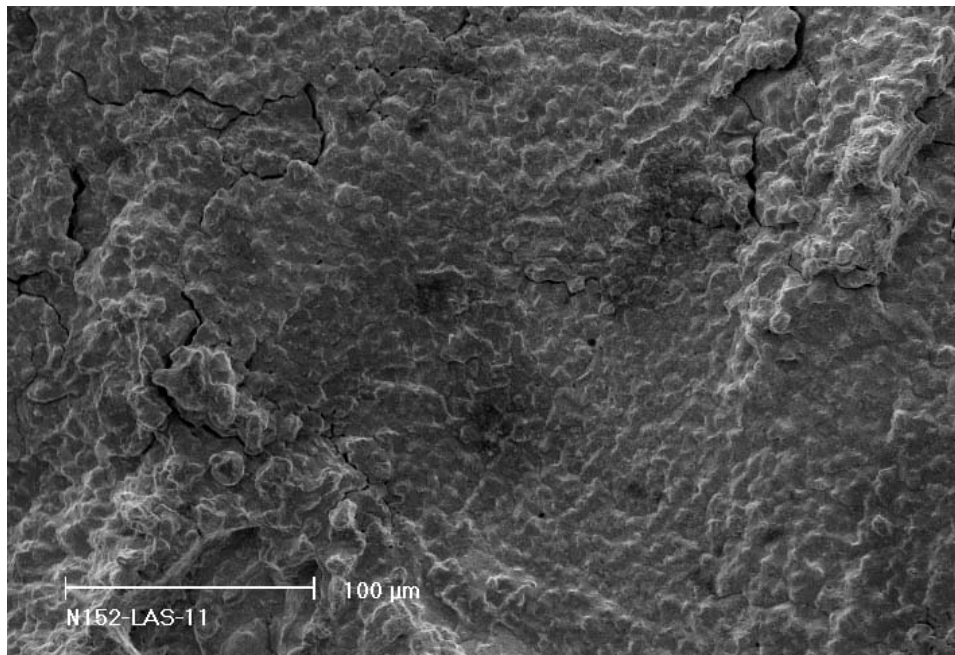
Fracture surface of specimen N152-LAS-11 at location 4a in Fig. 3-79. Crack advance is from bottom to top.
